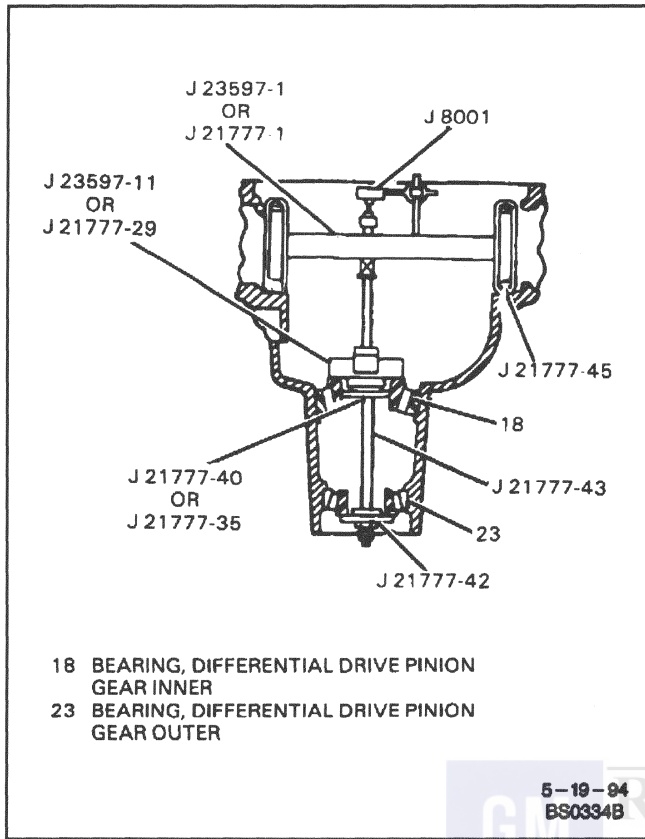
Pinion Gage Plate Installed in Rear Axle Housing
